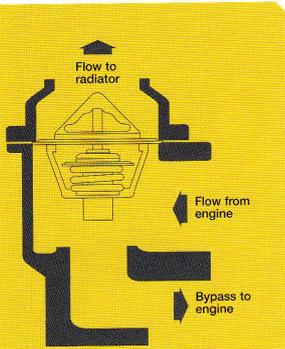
Wrong Thermostat used in an engine requiring a Bypass Thermostat, Engine runs hotter
